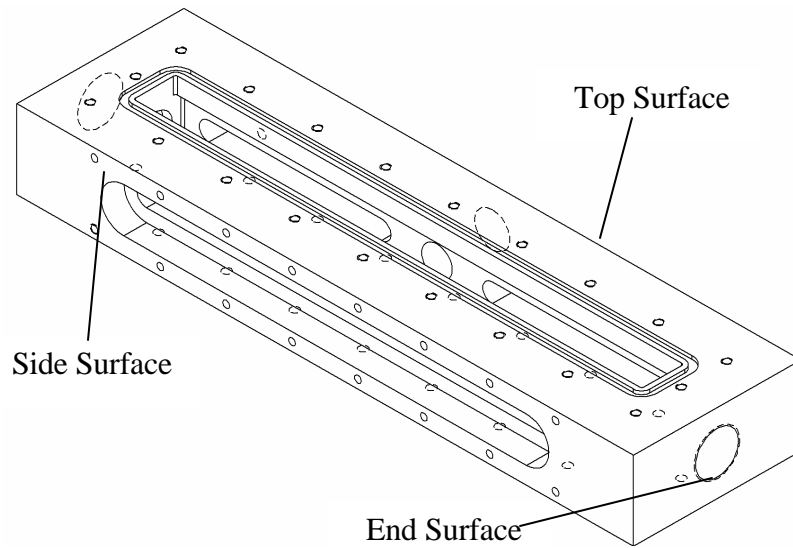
Isometric Drawing of Main Body with Named Surfaces
